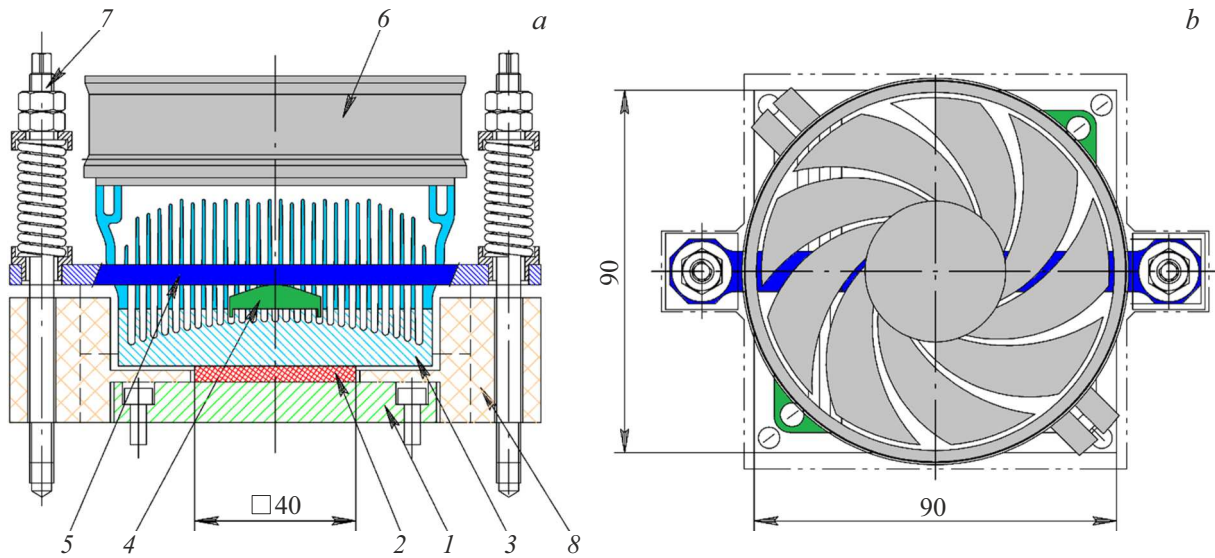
Thermoelectric assembly: *a* — side view, *b* — top view. 1 — copper plate; 2 — Peltier element; 3 — radiator; 4 — spring support; 5 — spring; 6 — fan; 7 — spring-loaded stud; 8 — thermal insulation.
